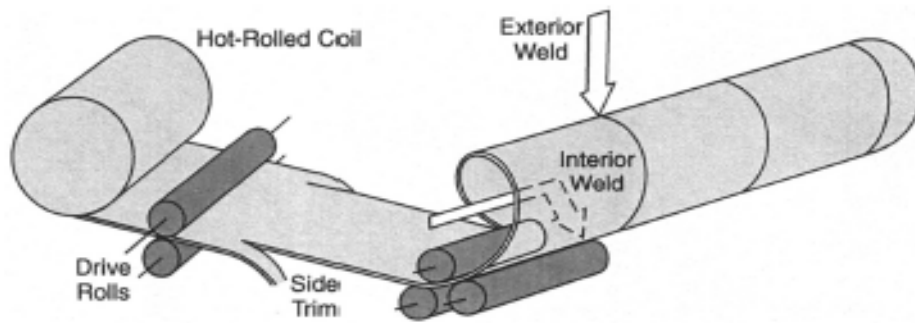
Schematic process diagram for making a spiral seam steel pipeline. Reproduced from [5].
